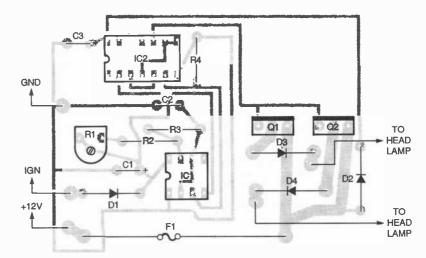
Use this parts-placement diagram as a guide when assembling the PC board, and when connecting it to your vehicle.
